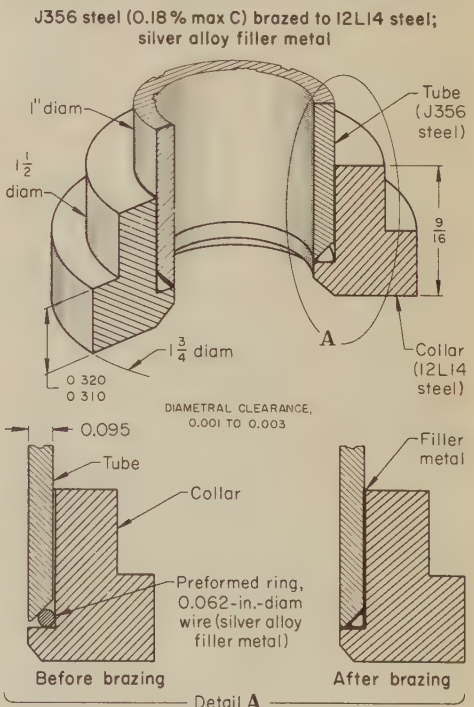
Tube-and-collar assembly that was salt bath brazed on a mechanized production line (Example 611)
